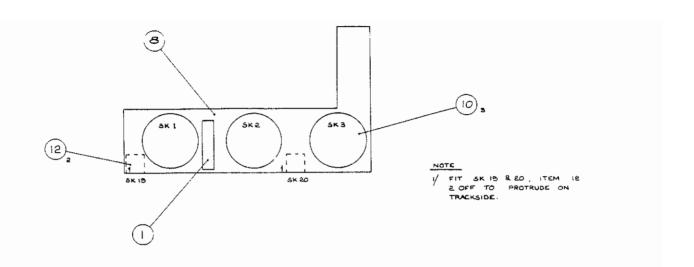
Component Layout, BNC Mounting Board (19-1206)
